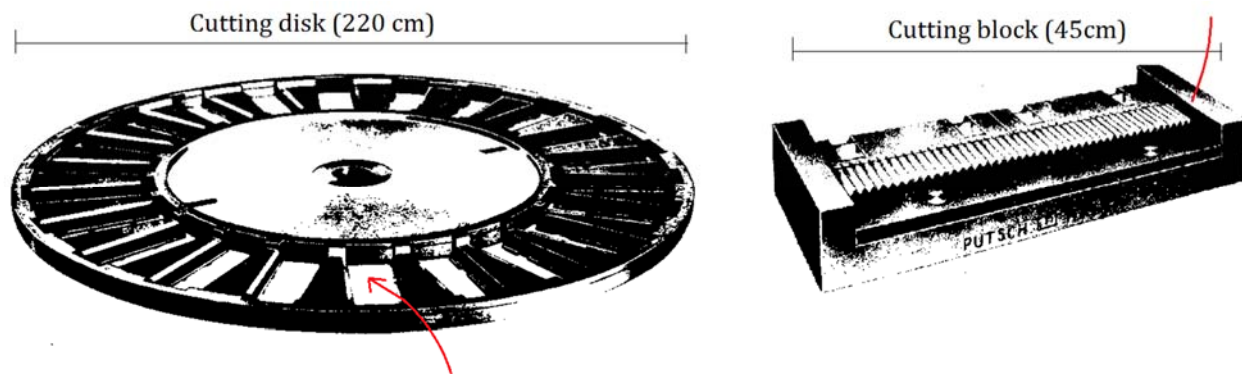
A cutting disk is placed horizontally in a slicer. Each cutting disk contains 24 knife blocks. Knife blocks can be removed from the slicer to change the two 20cm wide knives with sharp knives.
